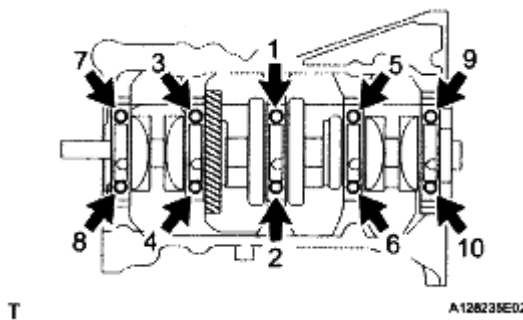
Identifying Main Bearing Cap Bolts Tightening Sequence
